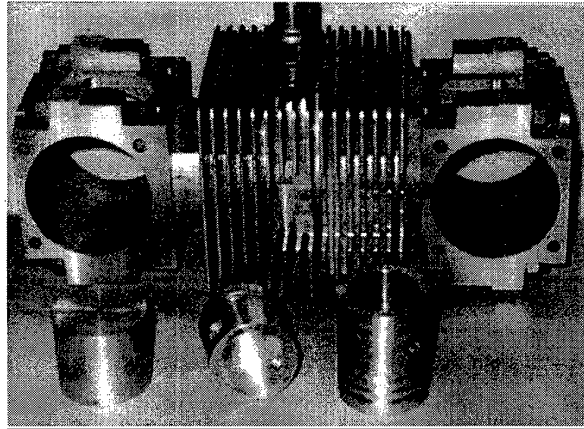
View of the article of "Piston" type fabricated from the UFG Al 1420 alloy which is supposed to be used in small overall internal combustion engines (it is shown on the figure behind the piston).
